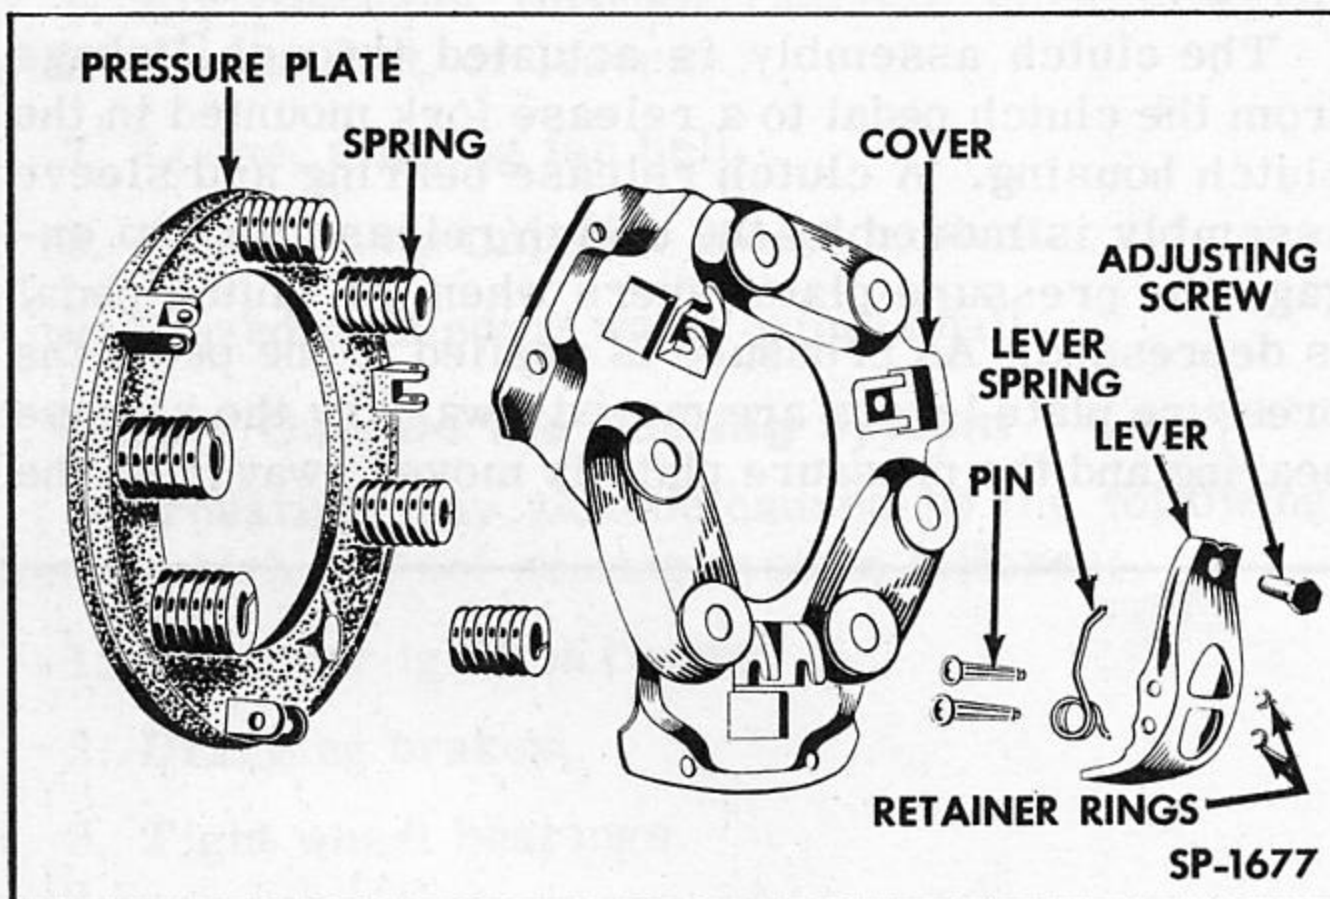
Six Spring Clutch Pressure Plate Assembly—Exploded View
